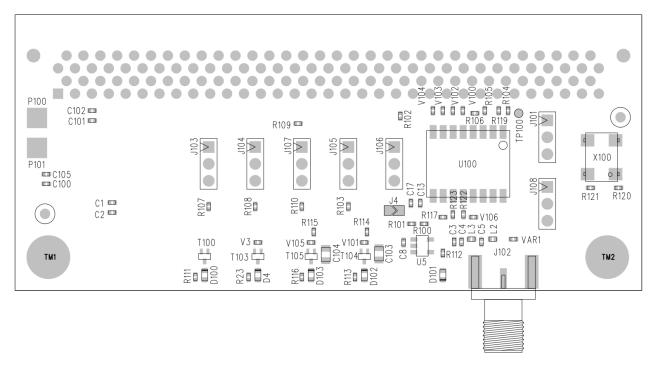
XM0110 Development Kit Daughter Board Assembly Drawing
